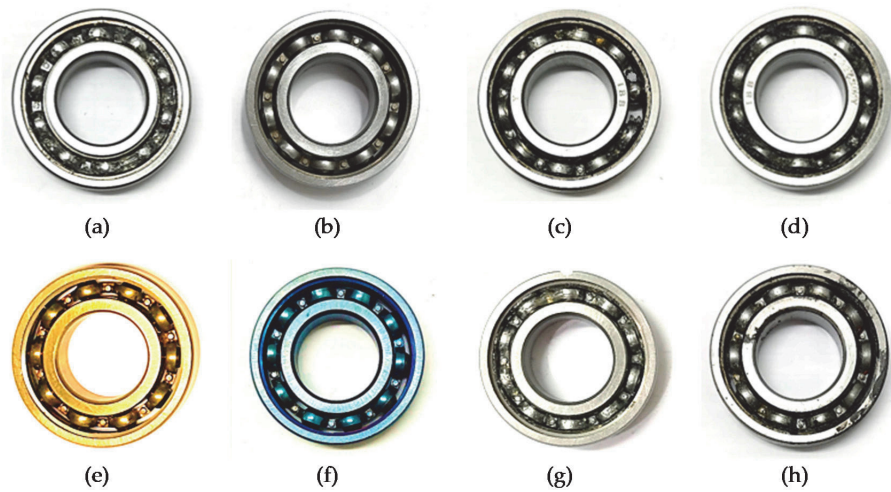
Tested bearings: (a) healthy bearing, (b) bearing without lubricant, (c) bearing with damaged separator, (d) contaminated bearing, (e) bearing tempered at 230 °C, (f) bearing tempered at 330 °C, (g) bearing with the cut outer raceway, (h) corroded bearing.
